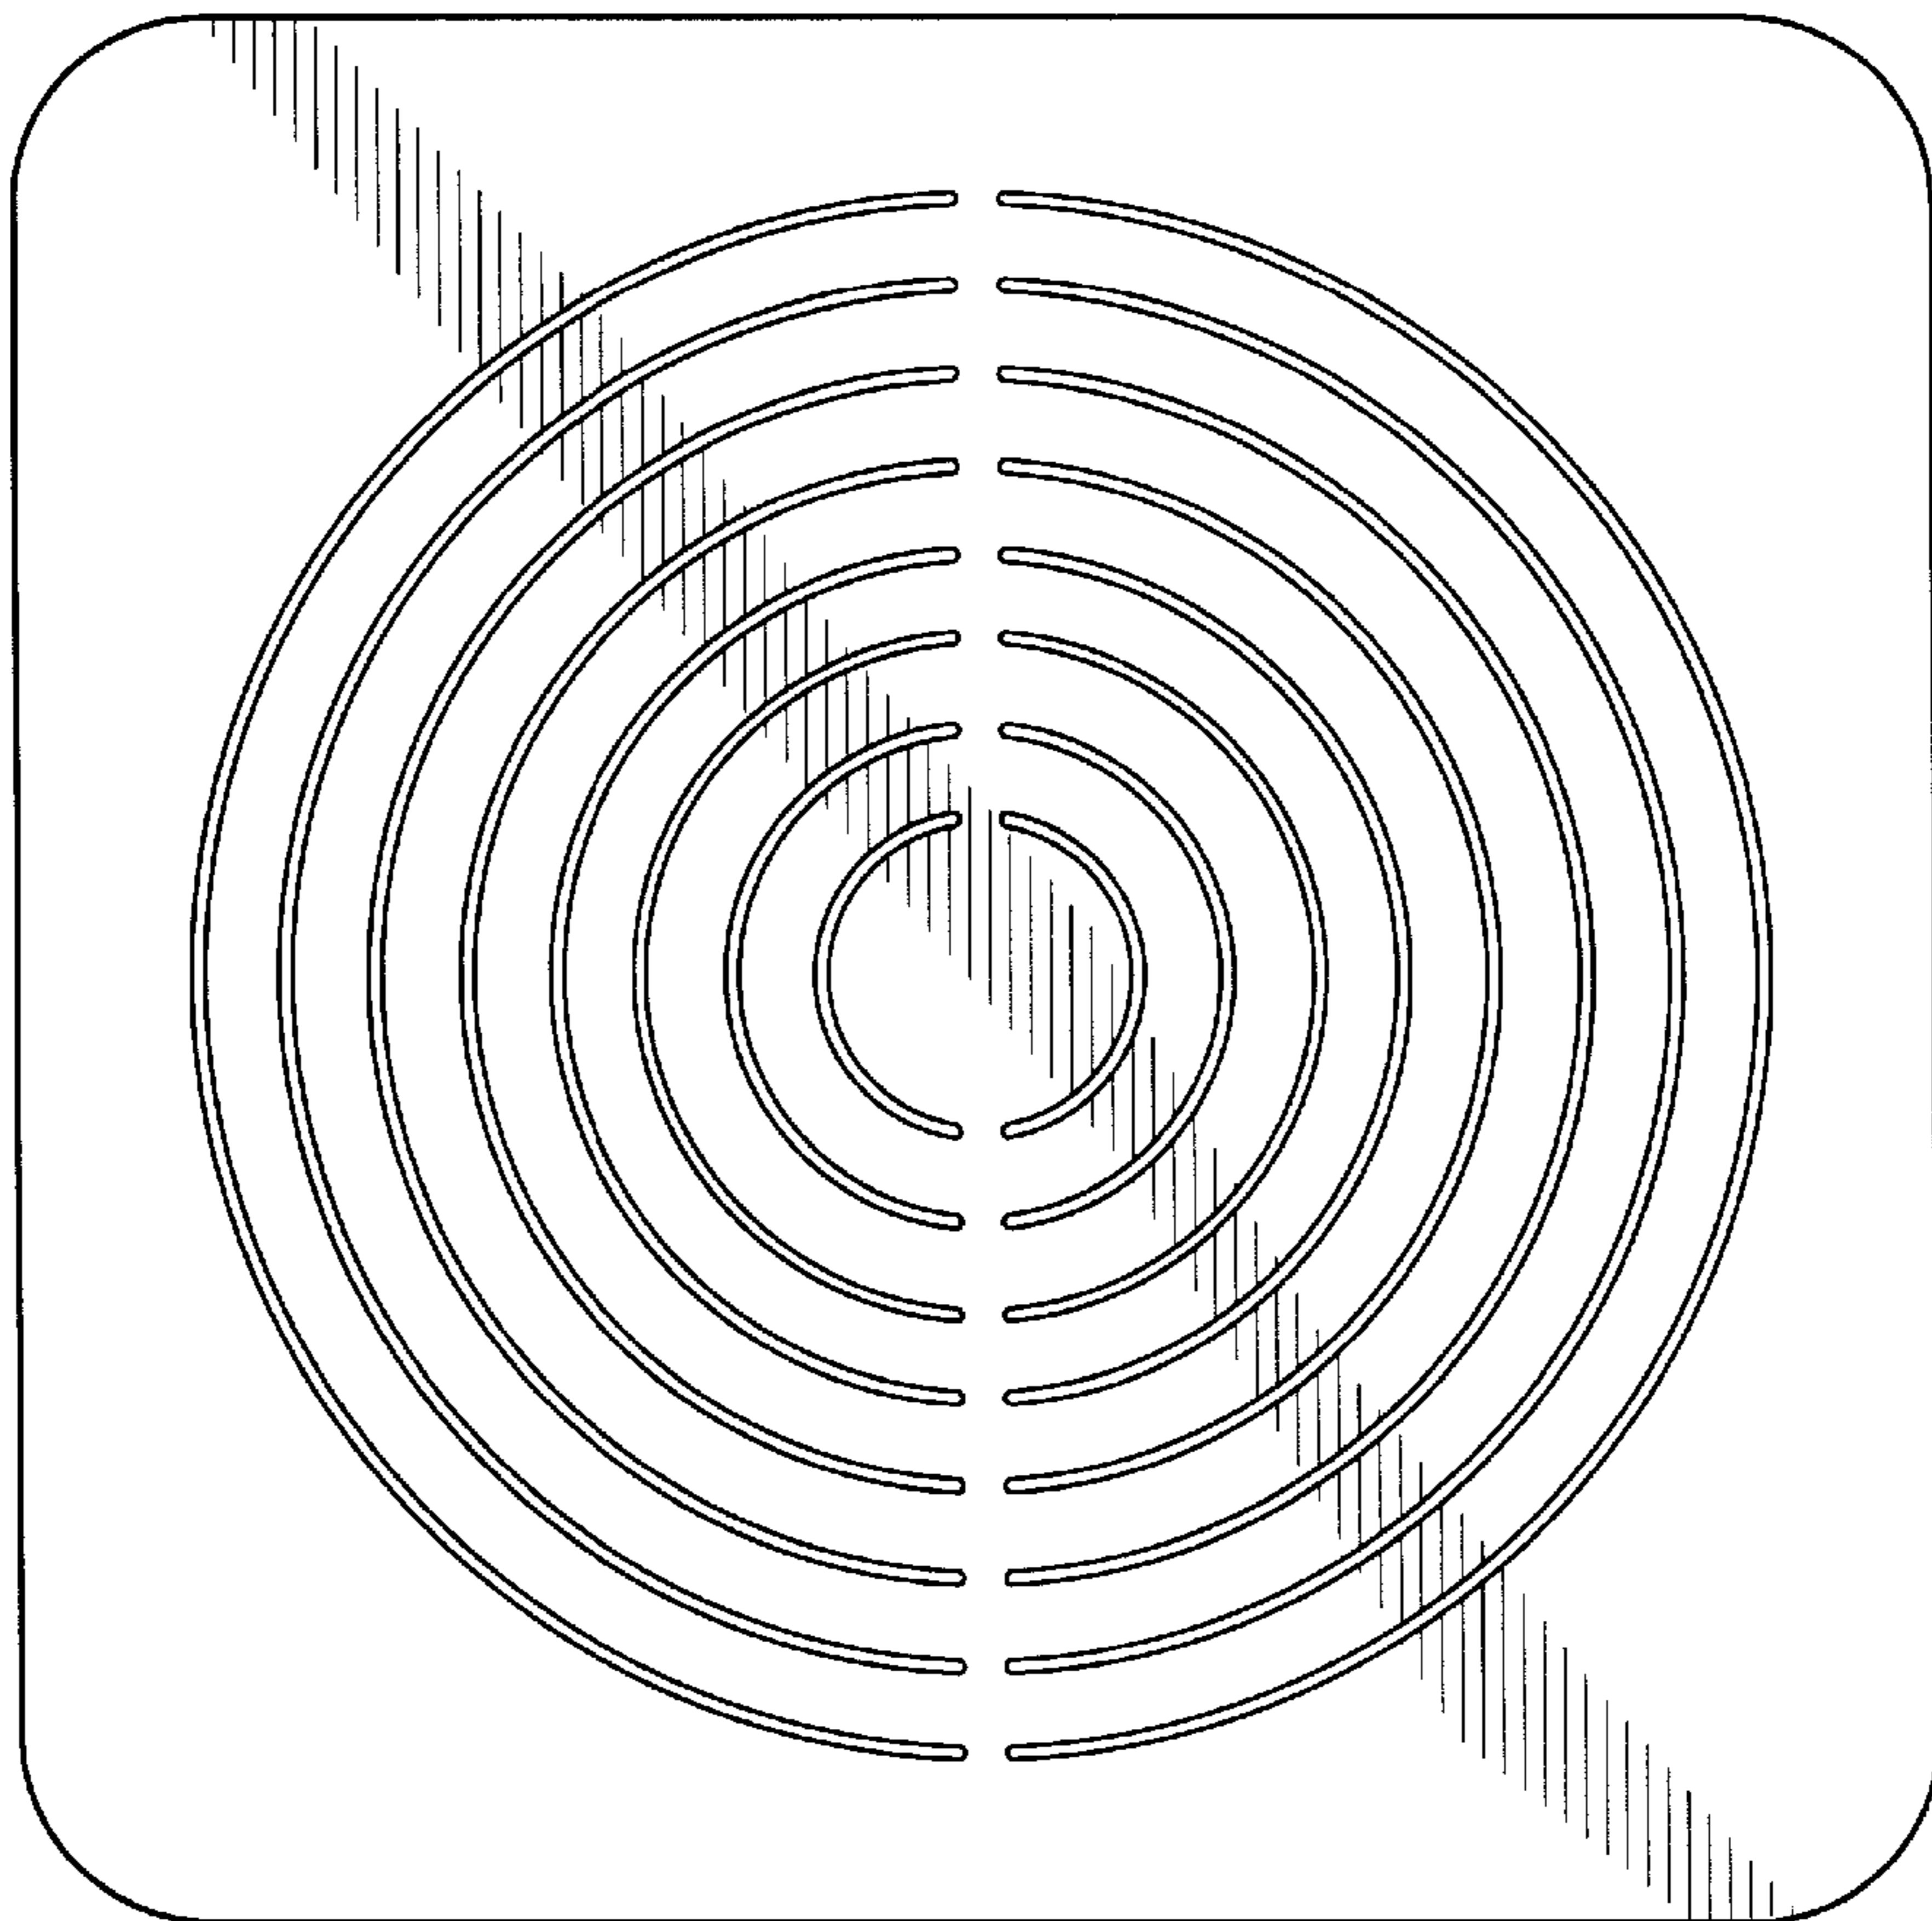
is a perspective view of the circle cutting template; FIG. 2 is a front view of the circle cutting template; FIG. 3 is a rear view of the circle cutting template; FIG. 4 is a top side view of the circle cutting template; FIG. 5 is a bottom side view of the circle cutting template; FIG. 6 is a left side view of the circle cutting template; and, FIG. 7 is a right side view of the circle cutting template.
